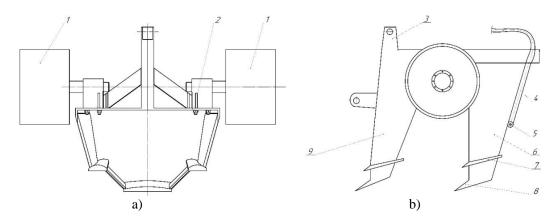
Subsoiler - fertilizer: a) Front view and b) side view; 1 - guide wheel, 2.3 - brackets for aggregation with the base machine, 4 - pipeline for fertiliser in the soil, 5 - injector, 6 - ripper (rack) of the second row, 7 - the upper chisel, 8 - the lower chisel 9 - the ripper of the first row, 6 - bracket for the base machine, 7 - the lid of the tank
